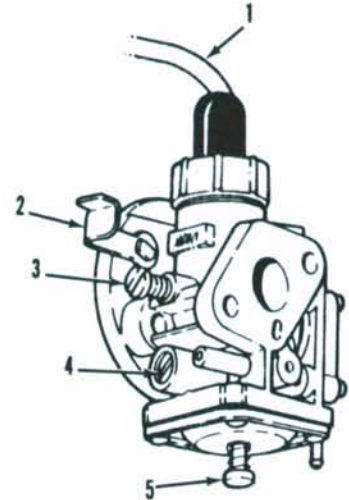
View of slide-valve-type diaphragm carburetor used on some models.
